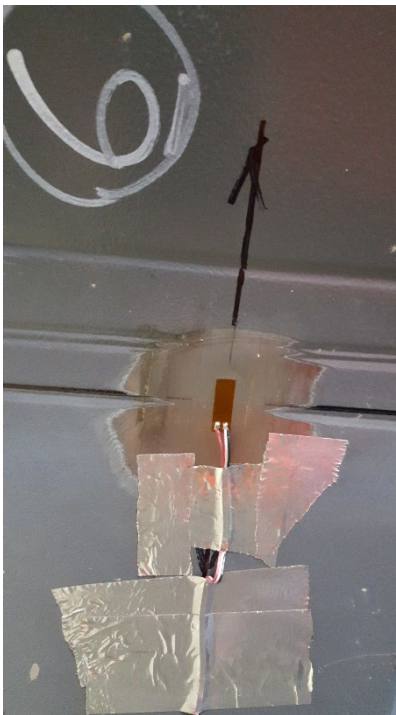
SGBF6 Center of Bottom Flange of RH Side Sill, Forward of Cross Bearer 7
